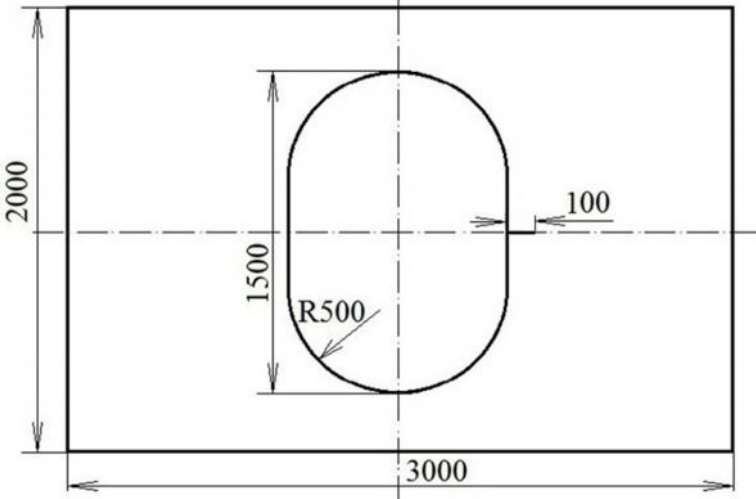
Plate geometry with a crack (dimensions in mm) [12]
